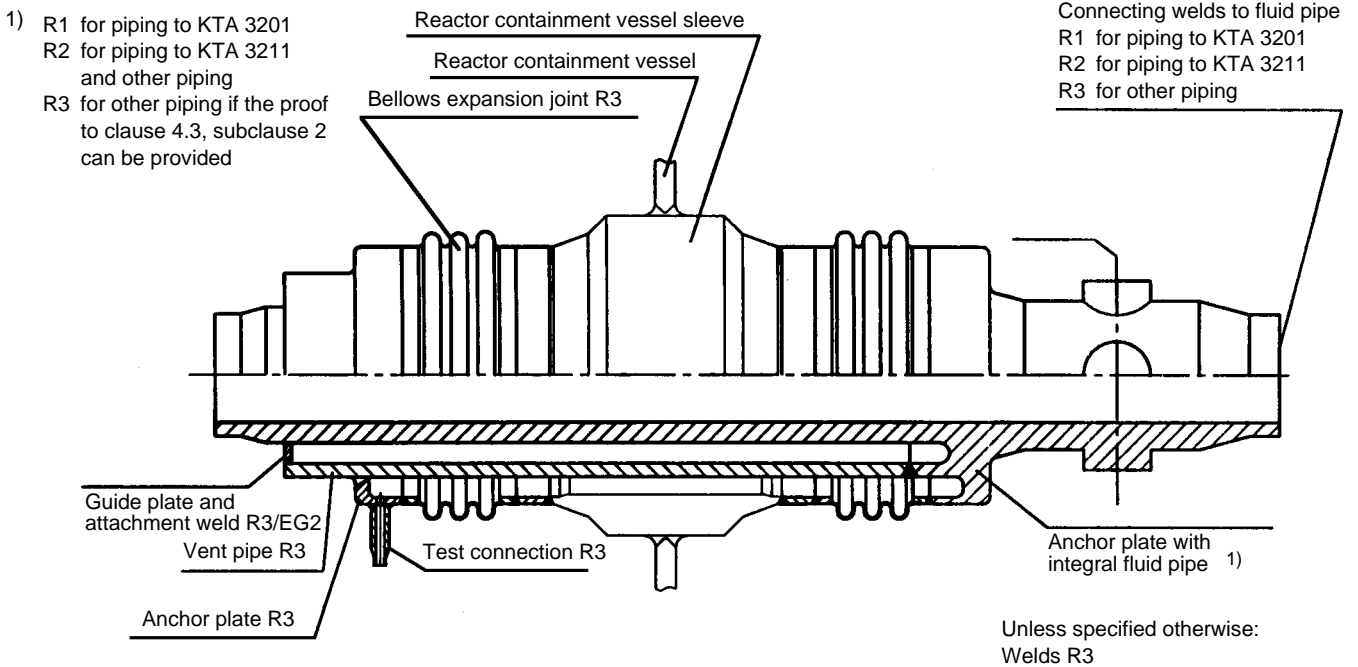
Example of pipe penetration of design type II and identification of design loading levels R2 and R3
